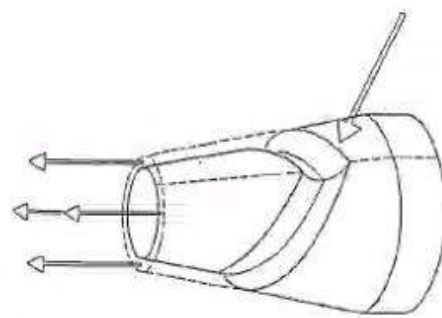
Mandrel of a side-fed die with a coathanger manifold (principle)
